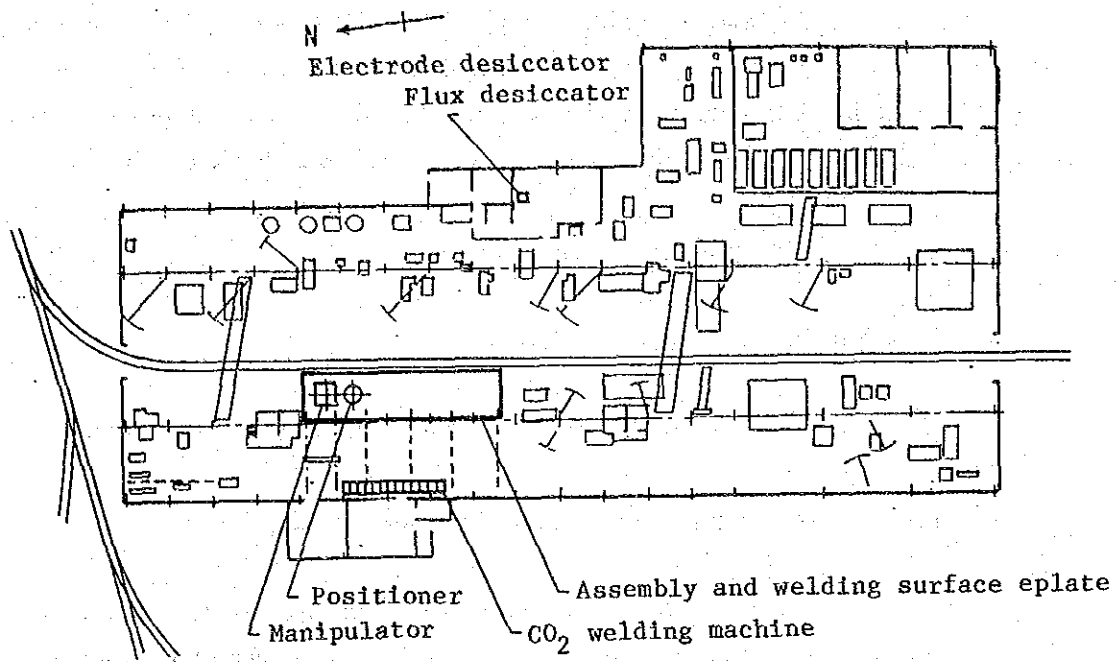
Layout of Facilities in Plate Shop
